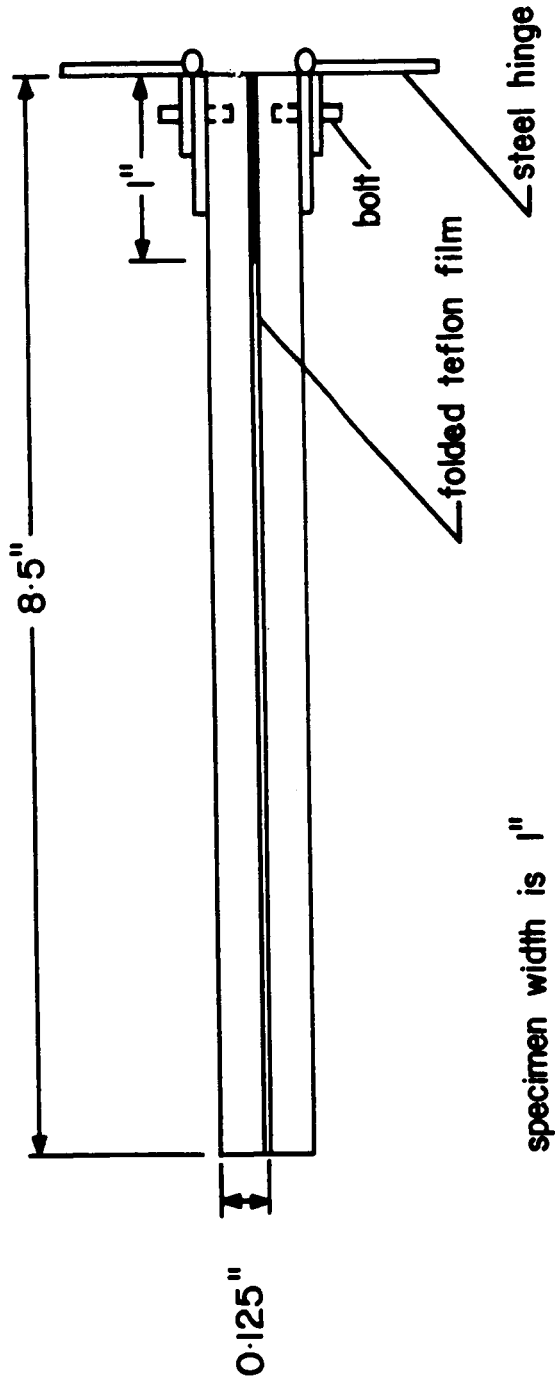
Double Cantilever Beam (DCB) test Specimens.
